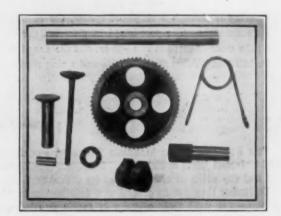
Cam Shaft, Cam, Cam Gear, Push Rod and Valve Spring Are Shown Here, as Used on Mercury Commercial Cars
